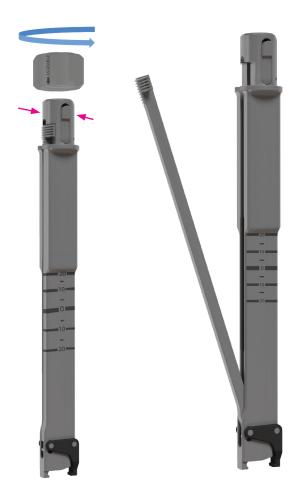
Detaching the Knob (left) and the Drive Linkage (right) from the Inserter.
